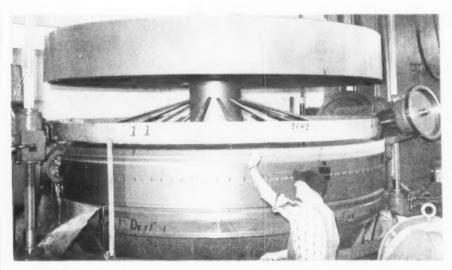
Hobbing of large bull gears for ship propulsion must be carried on with extreme accuracy. In this illustration showing construction of bull gear, teeth are completed on the upper wheel and hobbing has just been started on the lower wheel.
